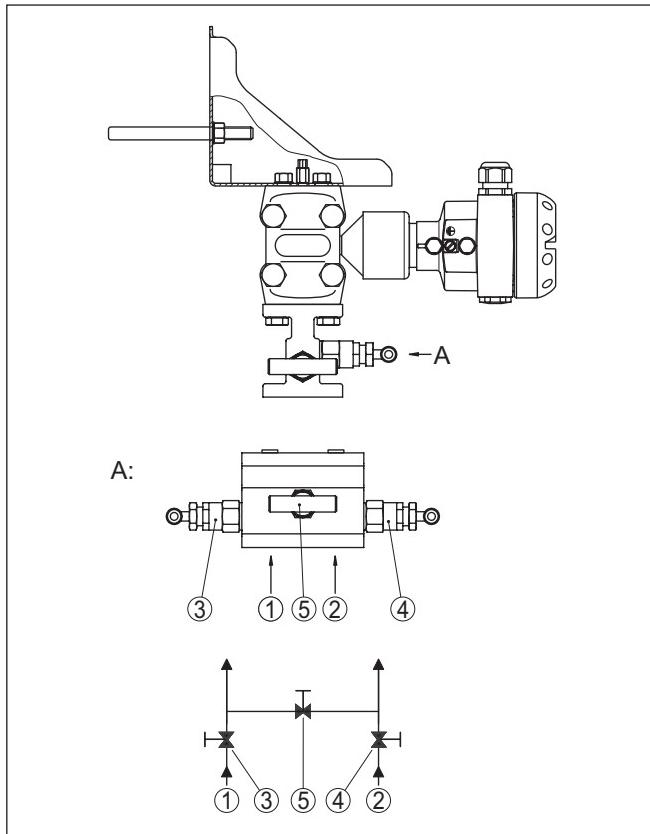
Connection of a 3-fold valve block, flanging on both sides
